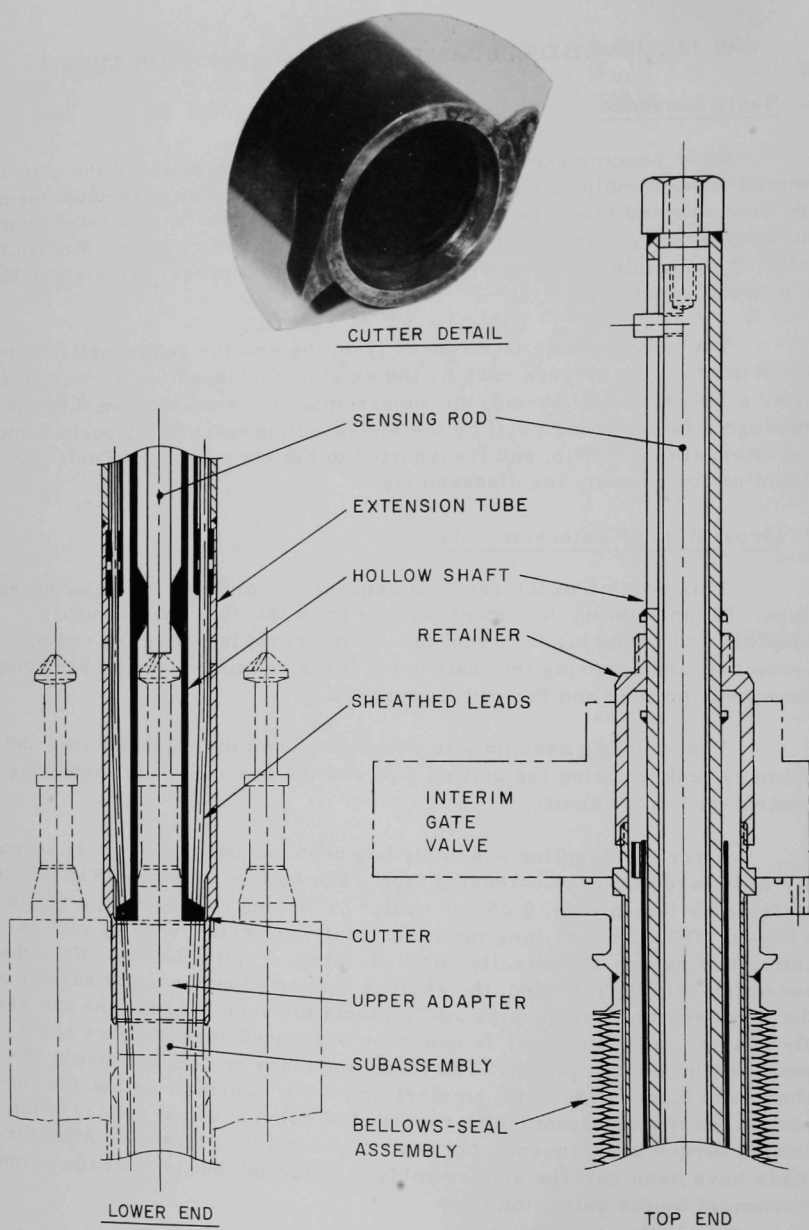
Assembly for Cutting Leads of Instrumented Subassembly. ANL Neg. No. 113-2999 Rev. 1.
